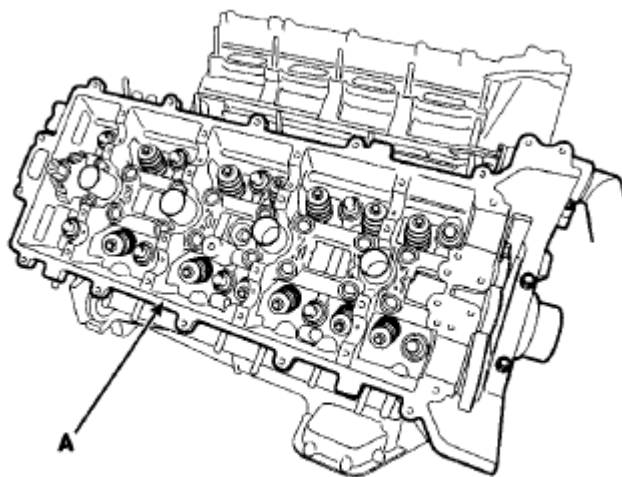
Identifying Hydraulic Lash Adjuster Assembly
